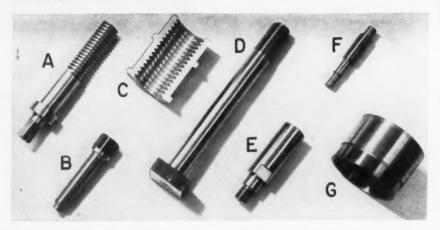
Typical samples of work threaded with attachment: (A) 1 1/8-inch Acme thread; (B) 3/4-inch Standard thread; (C) 1 3/4-inch
